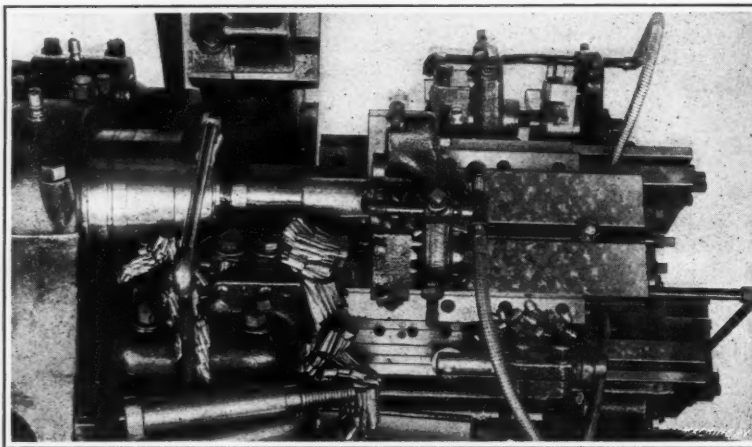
Standard Turner and Flat Forming Tool working together on Shoulder Screw
